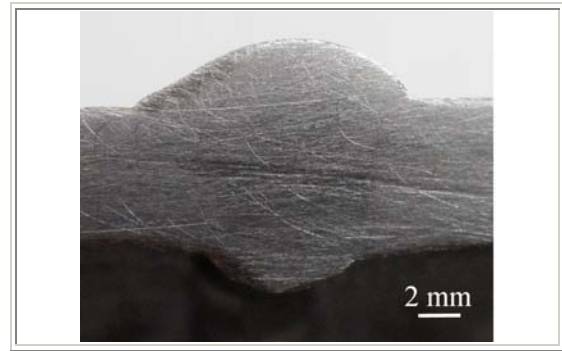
Penetration view of stainless steel X2CrNiMo17-12-2 weld
